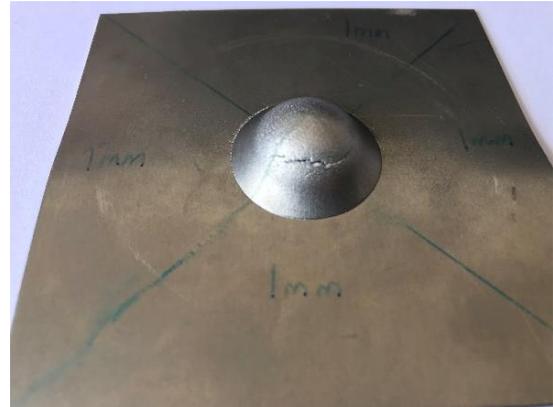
FRACTURE IN 1 mm THICKNESS SHEET-DRY CONDITION
